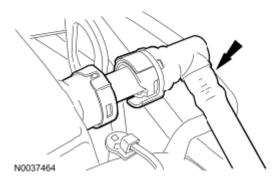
Locating Crankcase Vent Tube Of Valve Cover Courtesy of FORD MOTOR CO.
